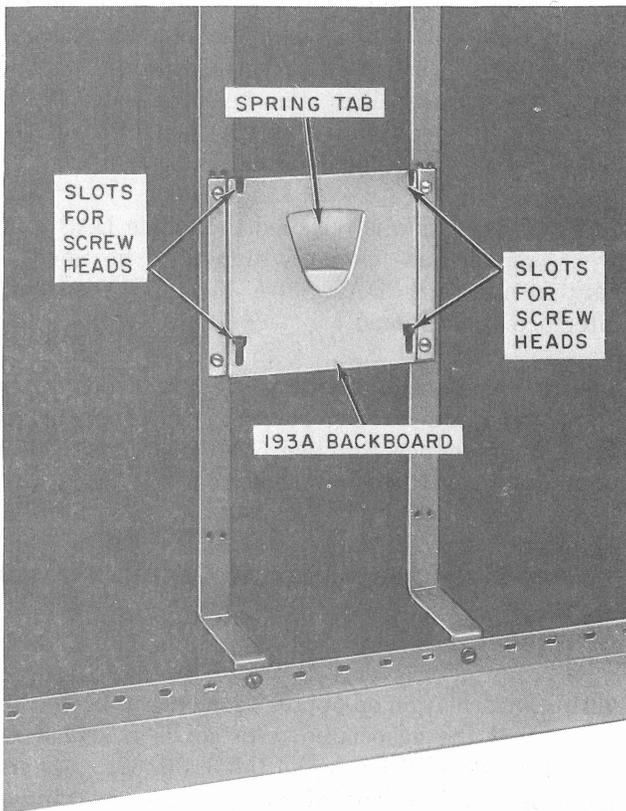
193A Backboard for Mounting DAS 830A in a TTY
